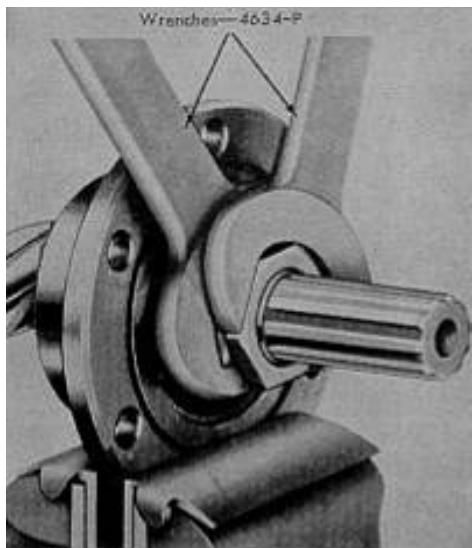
Adjusting bearings of main drive bevel pinion.
